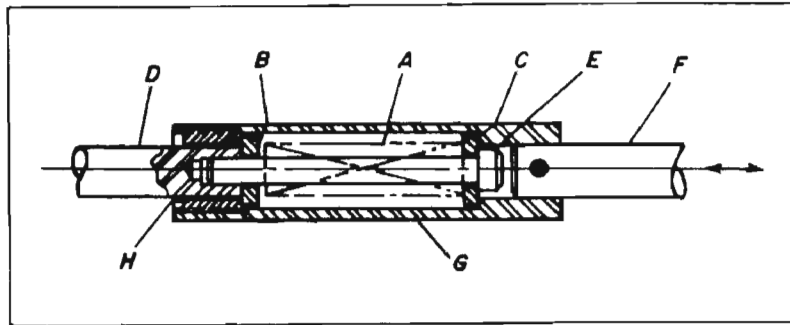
The mounting permits spring A to be compressed when shaft F is moved in either direction.
